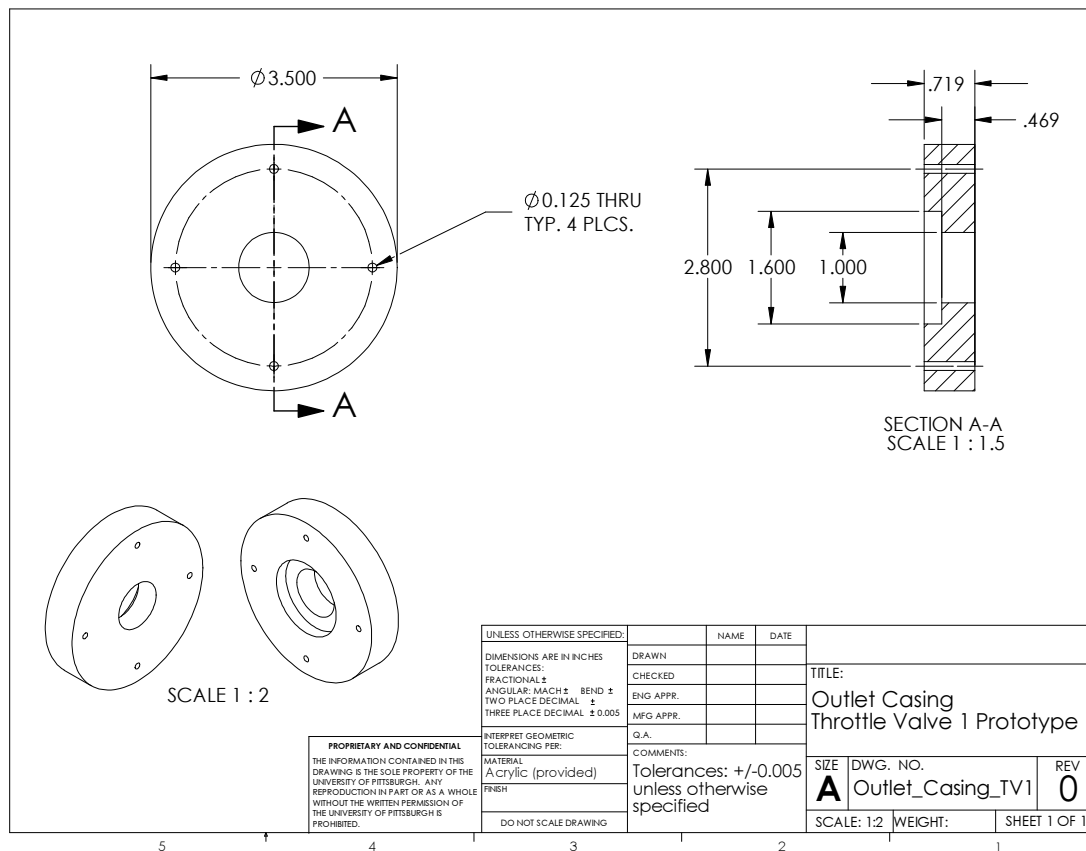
Outlet casing component drawing for barrel valve prototype (TV1).
